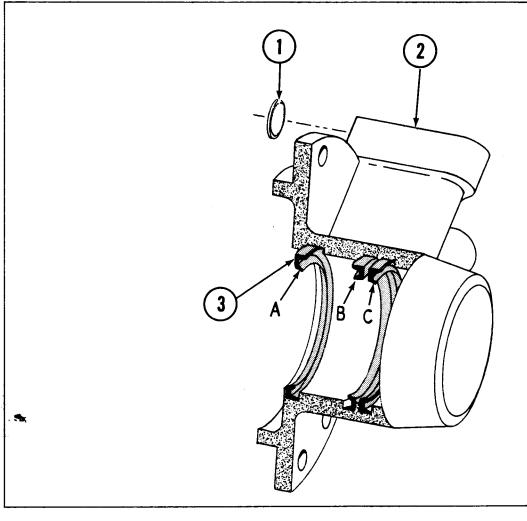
1st & 3rd and 2nd & 4th Range Oil Supply Cover.
